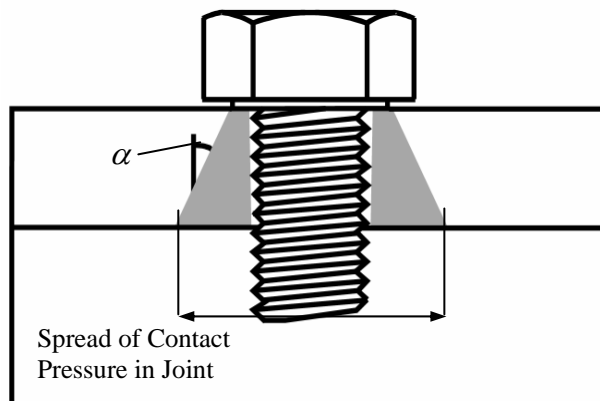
'Pressure-Cone Method for Determining Spread of Contact Pressure in a Bolted Joint.'
